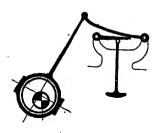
Diagram of Eccentric and Rolling Lever Valve Actuating Gear.
